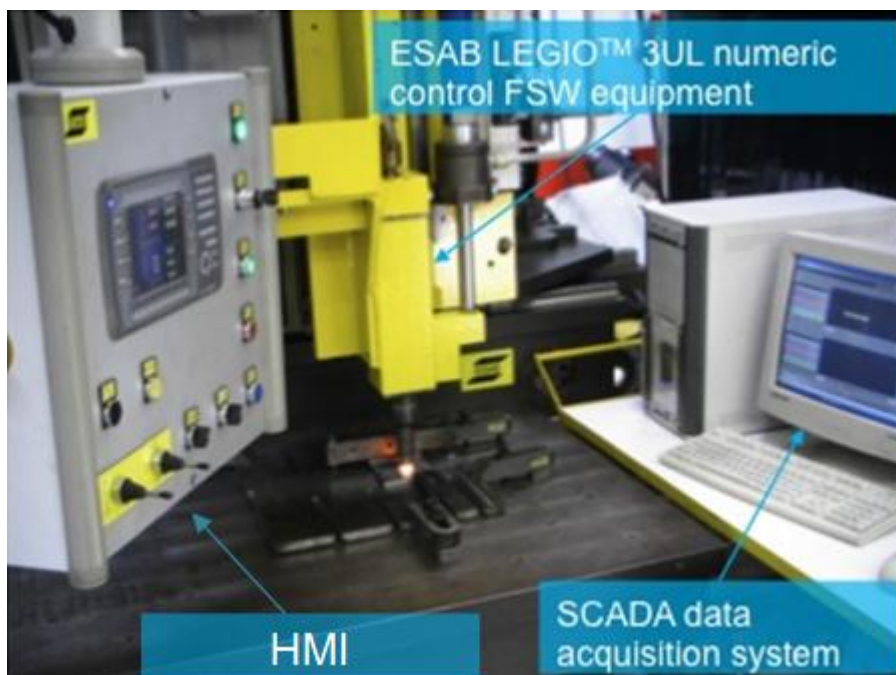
ESAB LEGIO™3UL friction stir welding machine.
